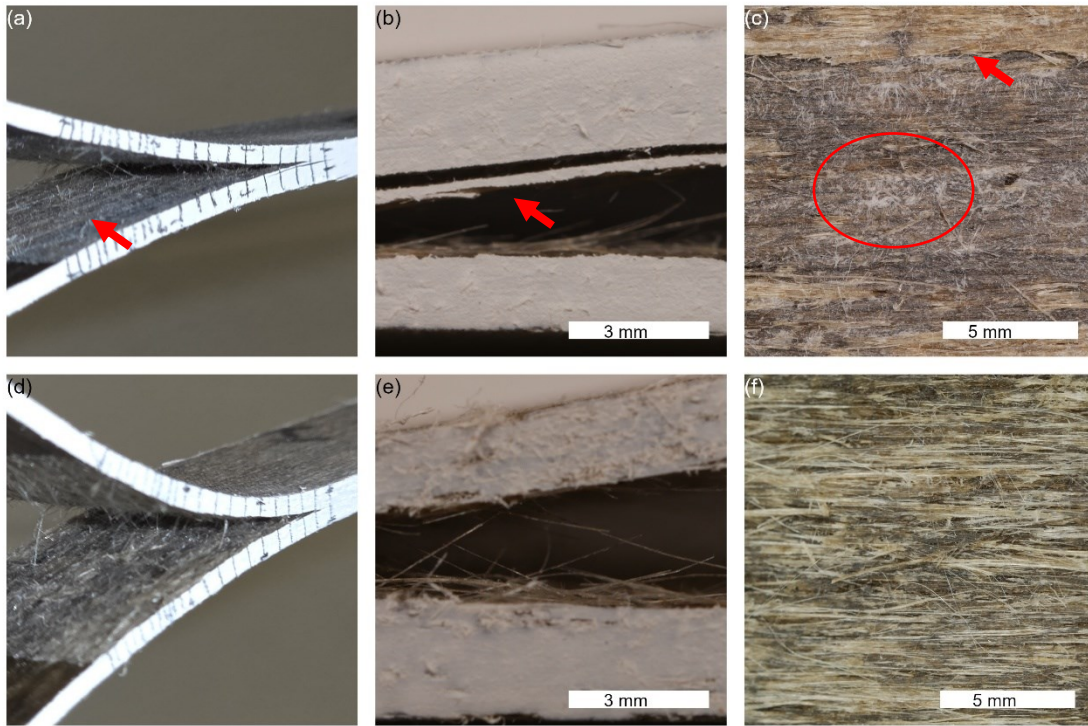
Test strip appearance at end-of-test, crack side view, and crack surface top view of flax-CNF (a-c) and flax (d-f) composites
